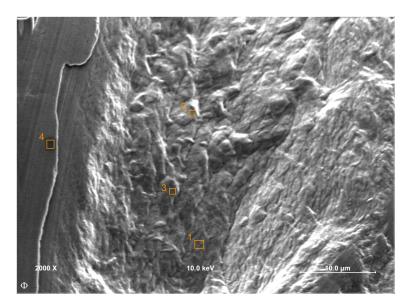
A close-up of the fracture surface with spots for analysis marked.
